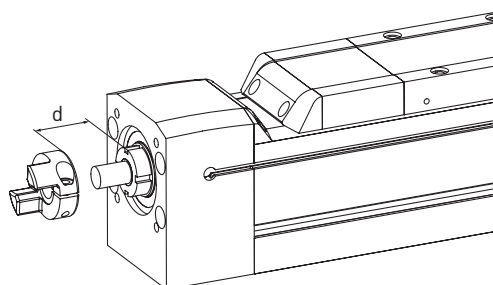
Attaching the clamping hub to the HM-S linear axis drive journal
